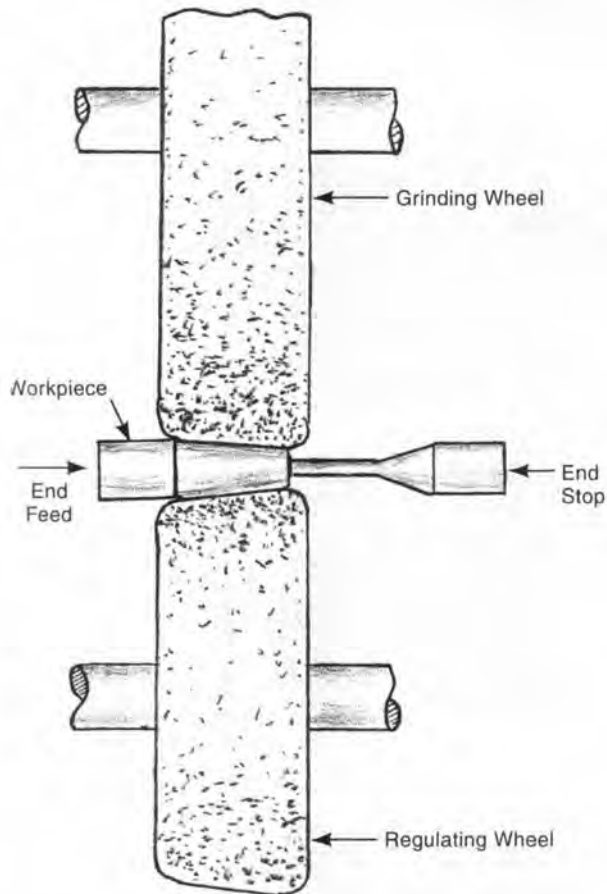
C1b3 End feed centerless grinding is useful when the surface to be ground is tapered. The workpiece is positioned and removed axially.
